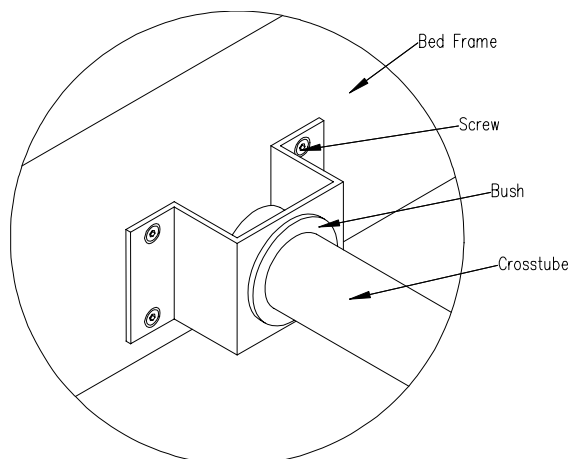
Pivot bracket that fastens directly to the sidewall to mount the cross tube within the height of the bed frame
